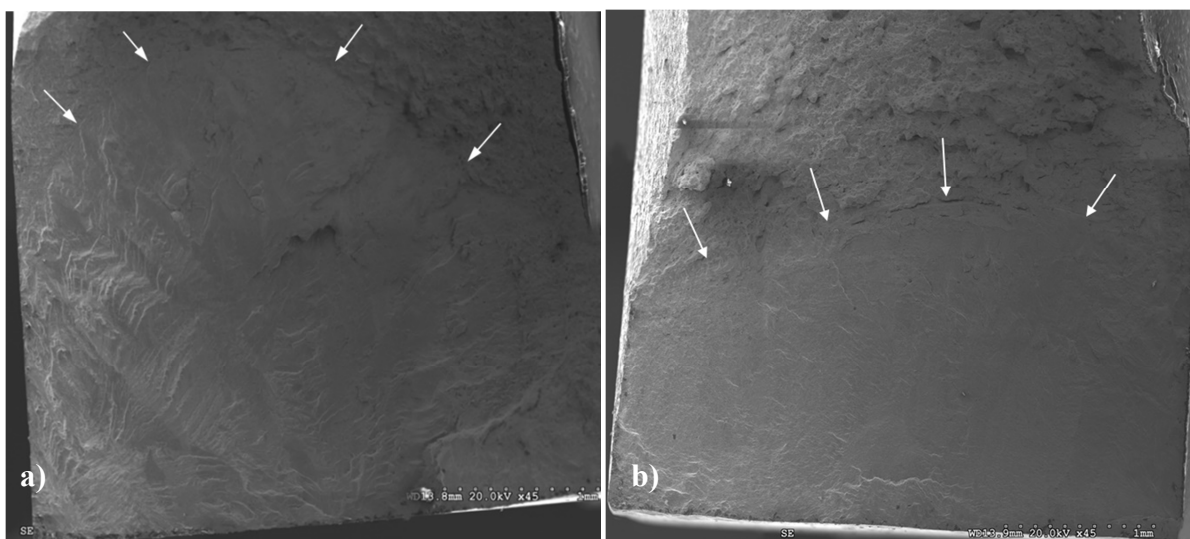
Fracture surfaces of samples with a) Inconel 625 coating - specimen no. 4 - loaded with maximal stress 775 MPa, b) 304 coating - specimen no. 3 - loaded with maximal stress 750 MPa (coating -base material interfaces marked with white arrows)
